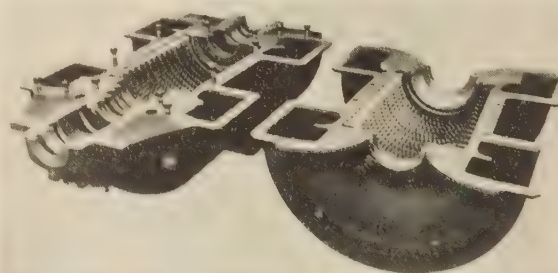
UPPER AND LOWER HALVES OF AXIAL-COMPRESSOR CYLINDER FOR VELOX BOILER
